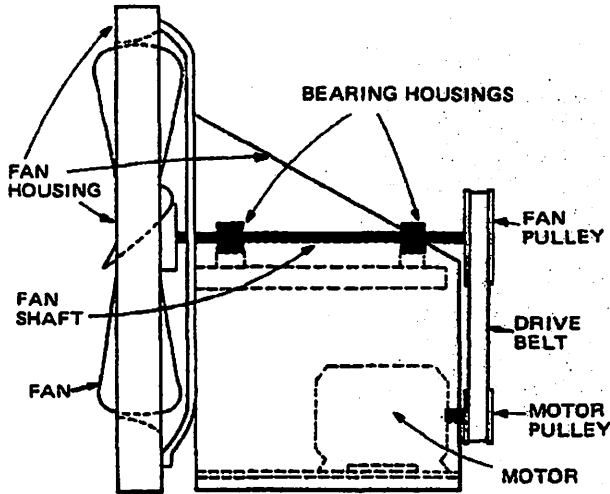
View of ventilating fan, showing shaft and bearing mountings.
